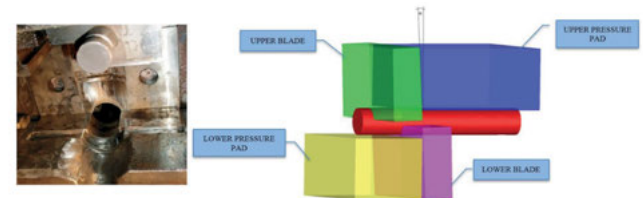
Scheme of the cutting method: a) image of the shearing machine and b) numerical model of the cutting process after changes – introduced blade inclination
